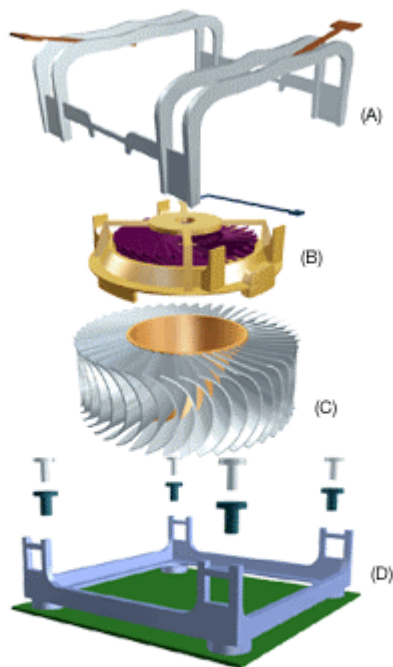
Intel's reference design for a socket 478 thermal mechanical solution. Note: This picture is for illustration purposes and actual dimensions will vary.
